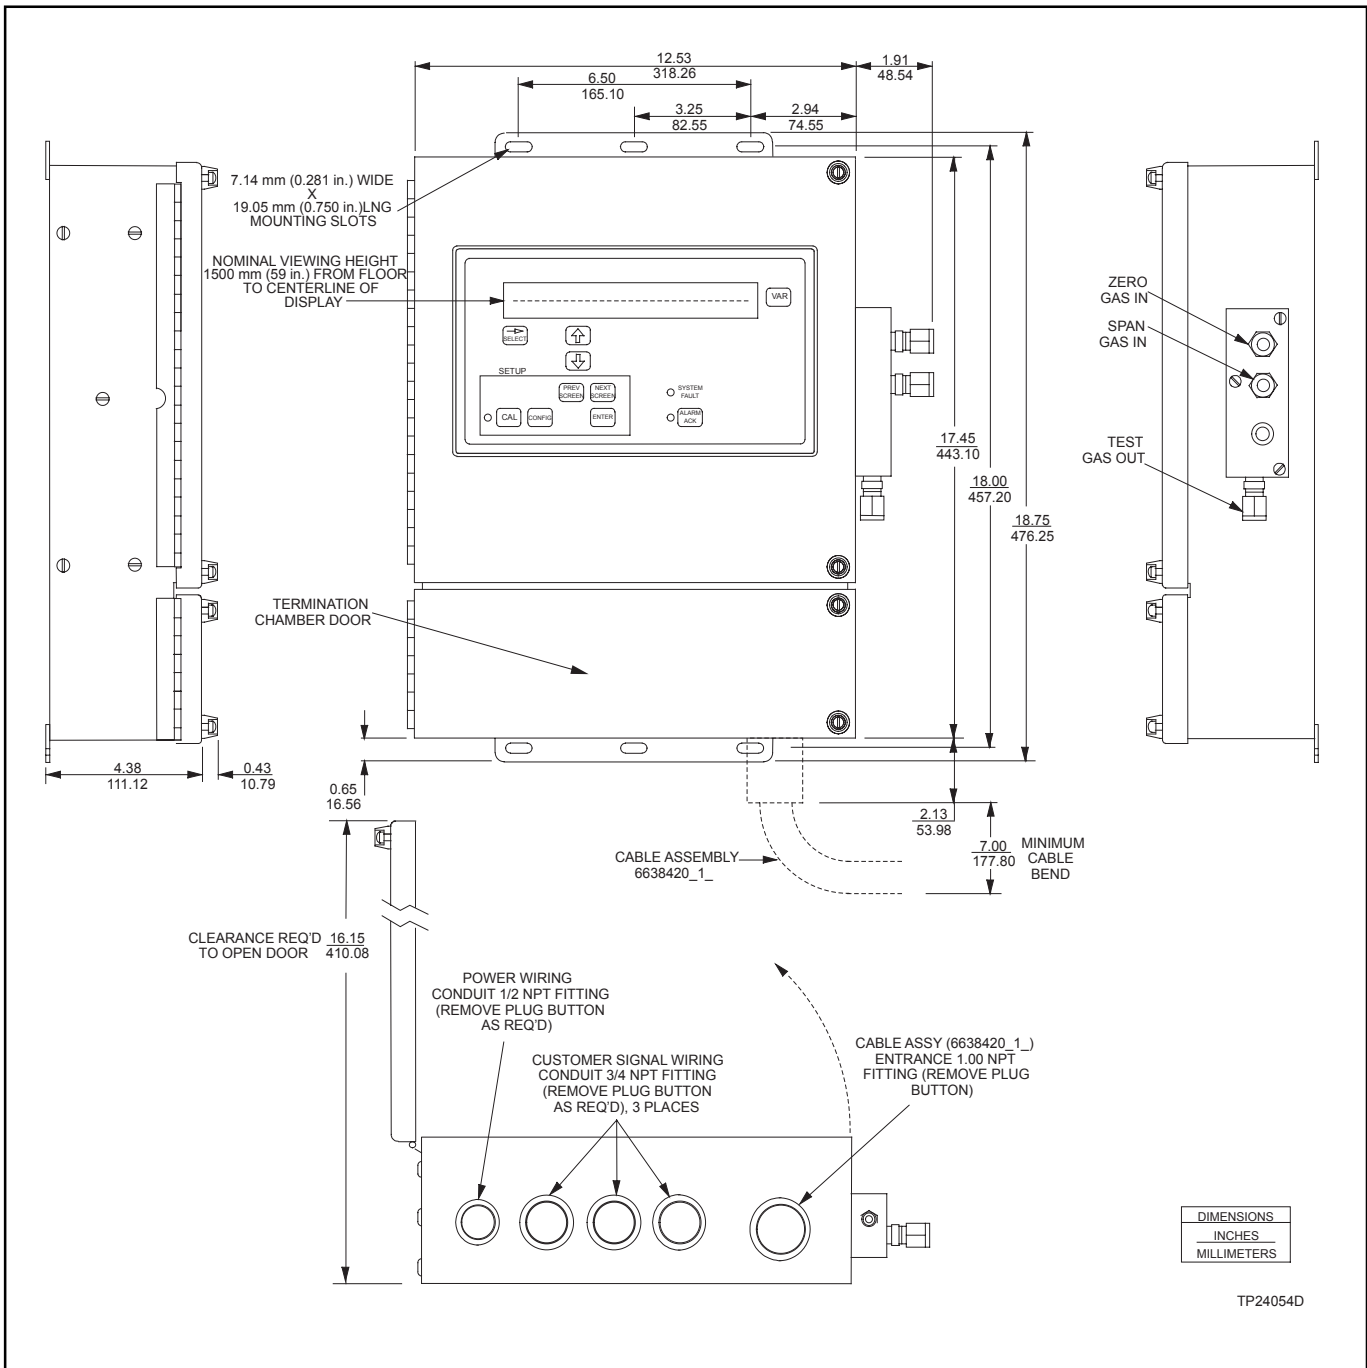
Outline and Clearance Requirements (Electronics Assembly)
